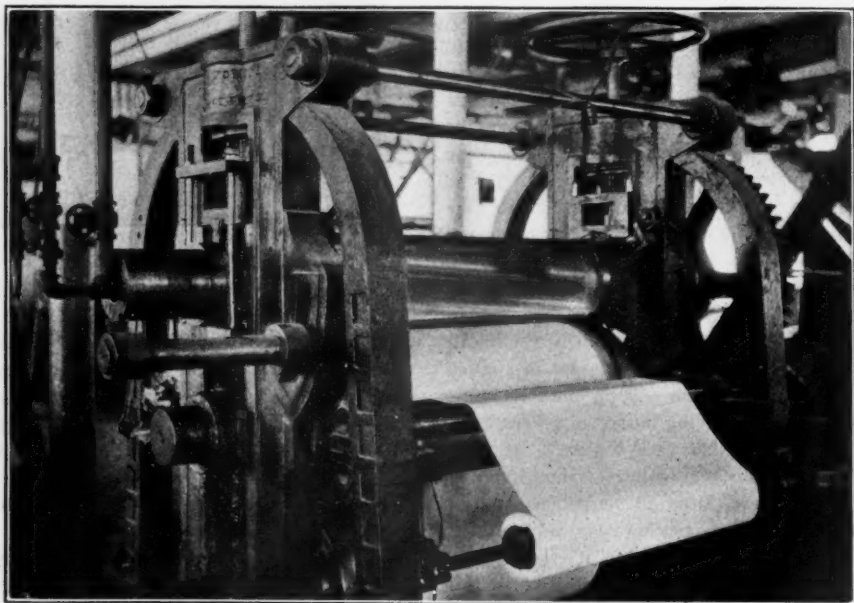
A CALENDERING MACHINE IN OPERATION. THE GAS FLAME USED TO HEAT THE UPPER ROLLER IS INTENSIFIED BY MEANS OF COMPRESSED AIR.
